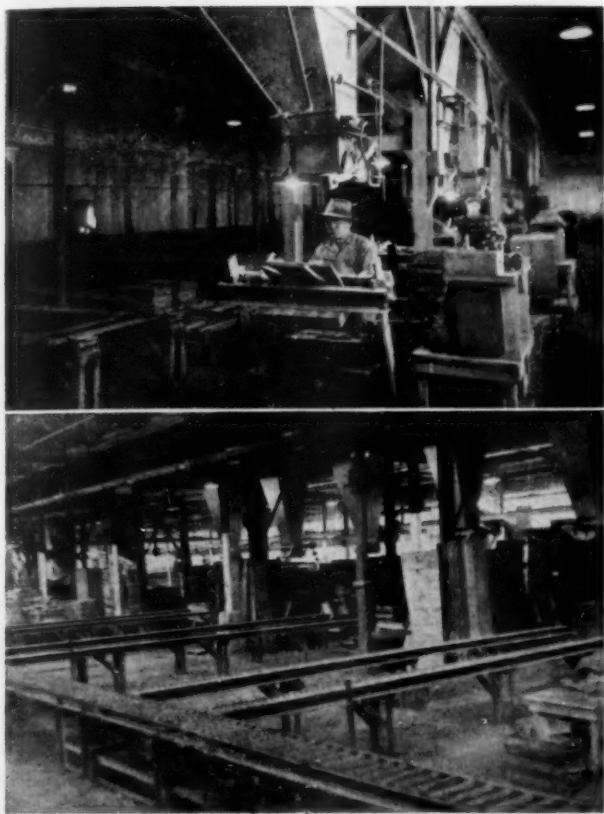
VIEWS ILLUSTRATING HOW FLEXIBILITY OF ROLLER CONVEYORS PERMITS THEIR USE FOR STORAGE PURPOSES.
